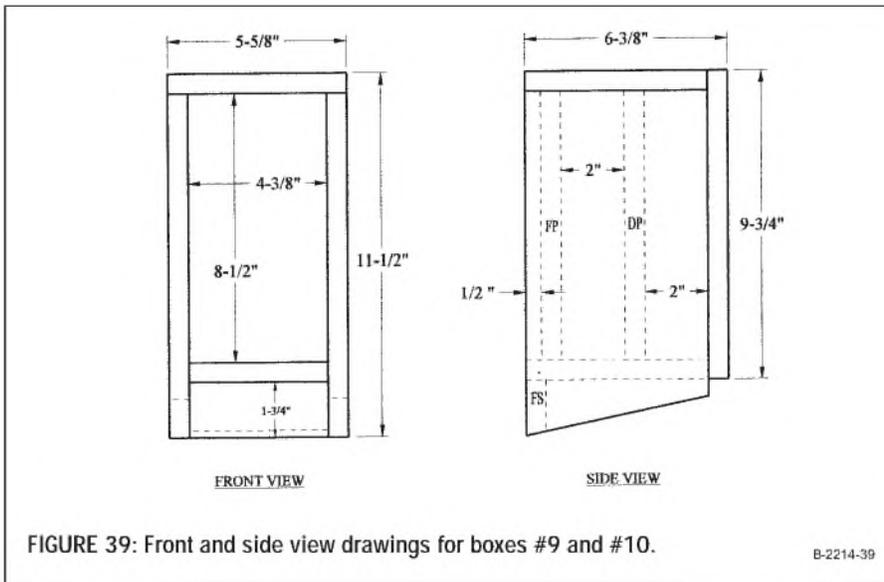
Front and side view drawings for boxes #9 and #10.
